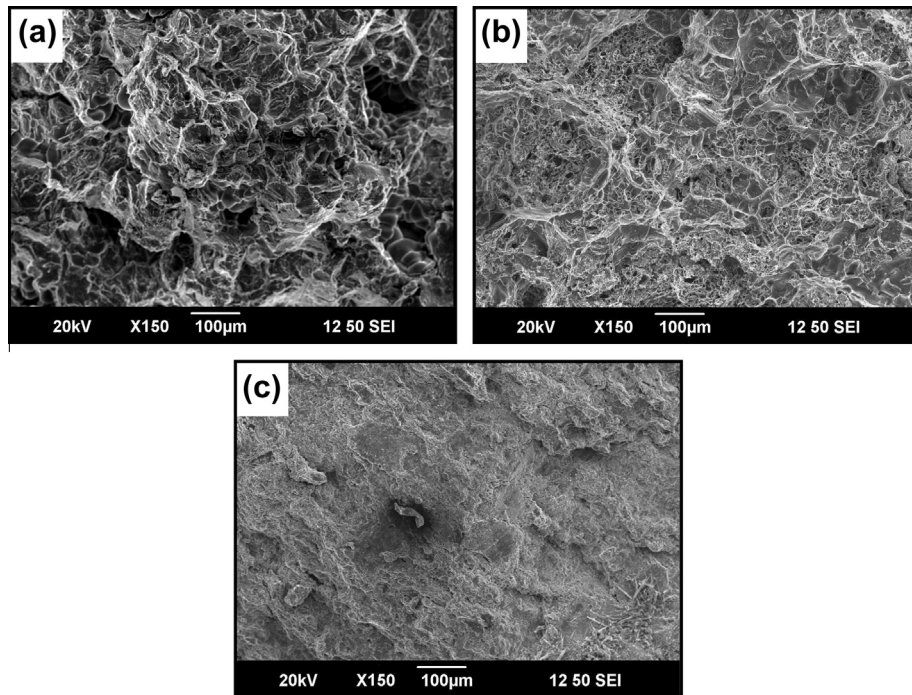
SEM micrograph of fracture surface of; (a) cast AA6061, (b) cast and (c) welded AA6061/B₄C AMC.
